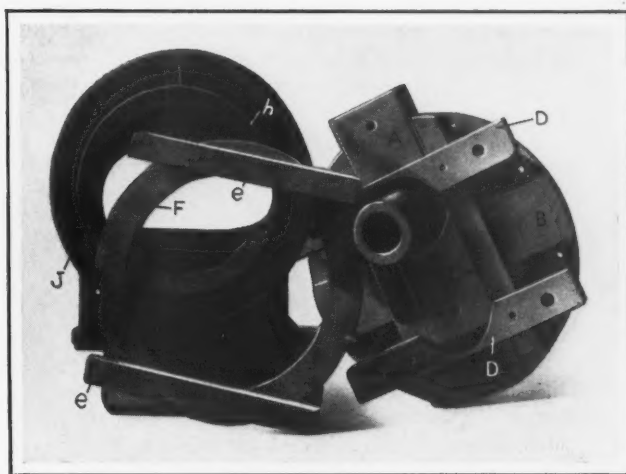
Attachment shown in Fig. 1 as it appears when partly dismantled
